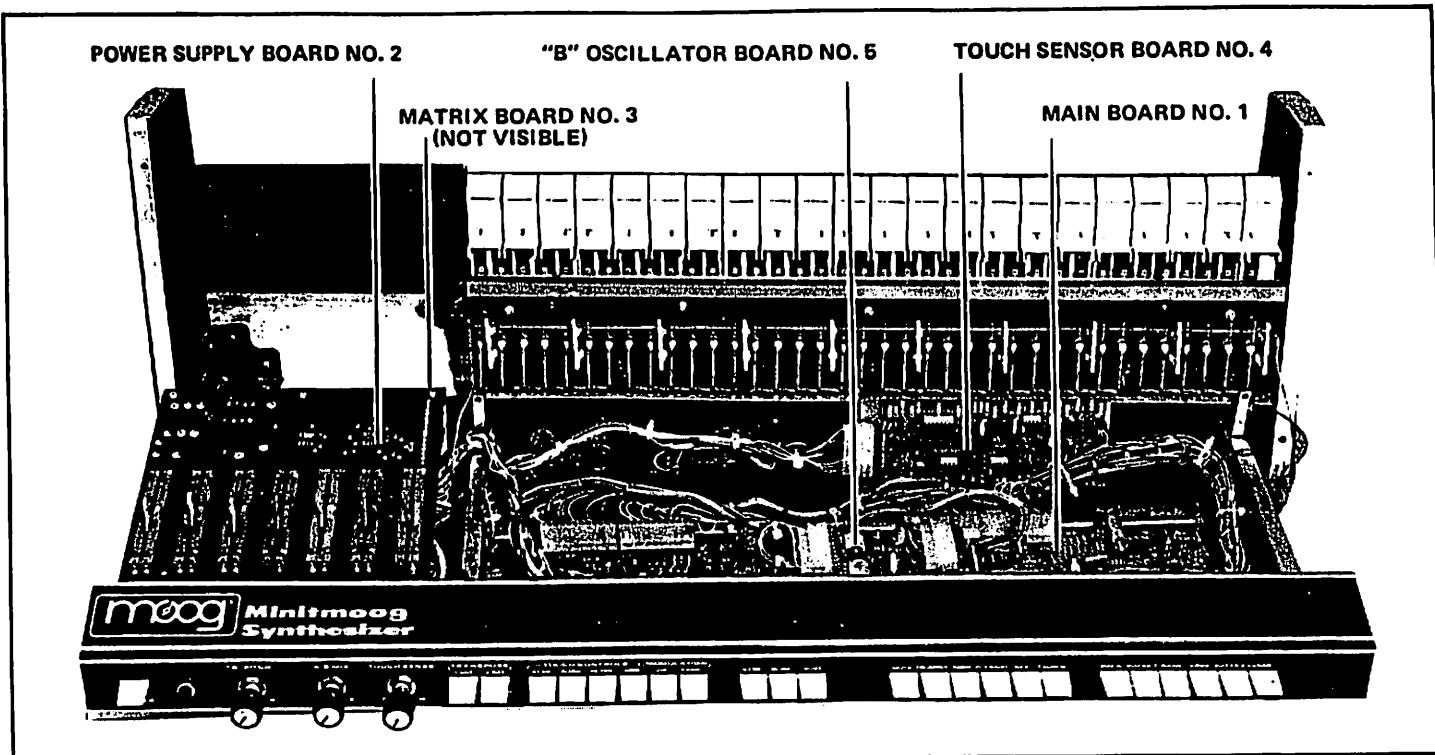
MINITMOOG PRINTED CIRCUIT BOARD LOCATIONS (INSIDE VIEW)
